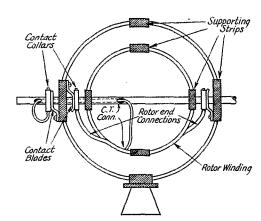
Contact details for the low-frequency coil assembly. The collars and contact blades are the type used in transmitting condensers.
